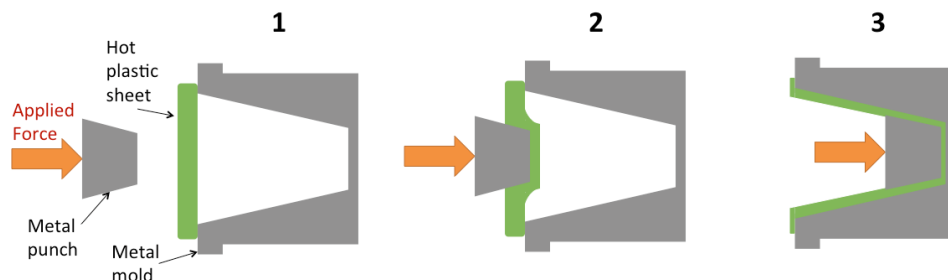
Side-view schematic illustrating the three basic steps in a mechanical thermoforming process used to make a cup from a hot plastic sheet.
